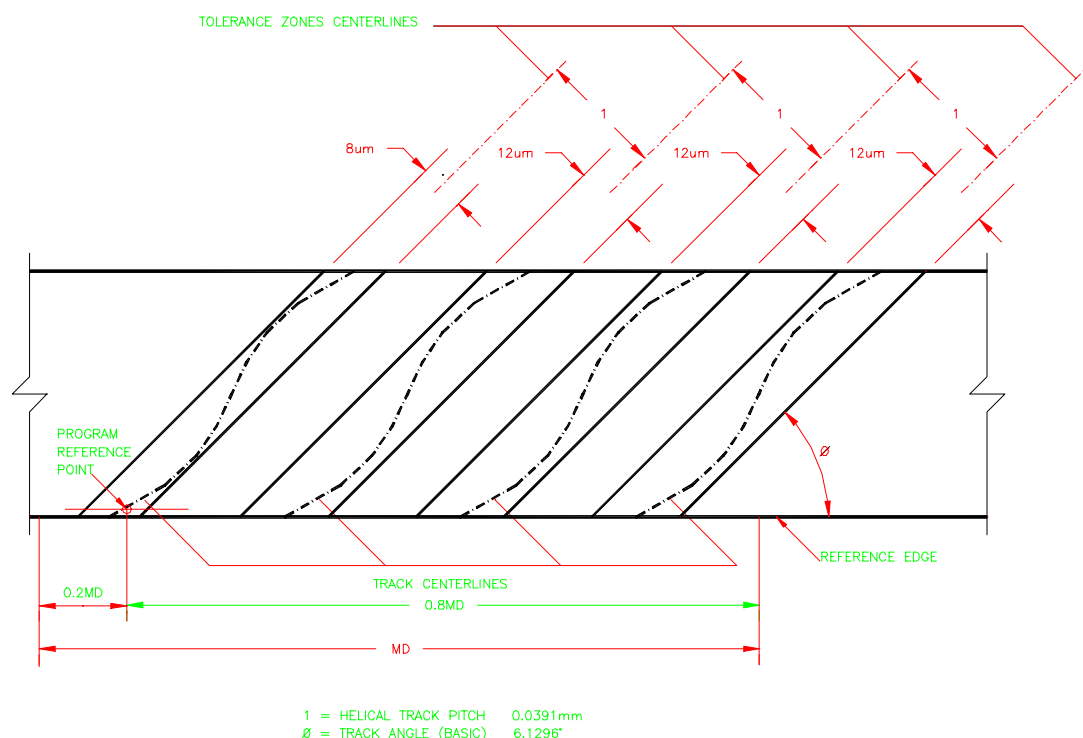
Location and dimensions of tolerance zones of helical track record
